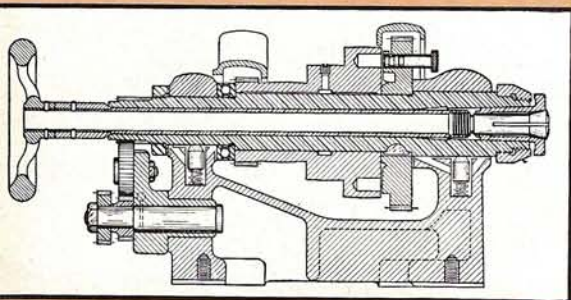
Cross Section of Headstock Showing Collet Chuck Attachment.
